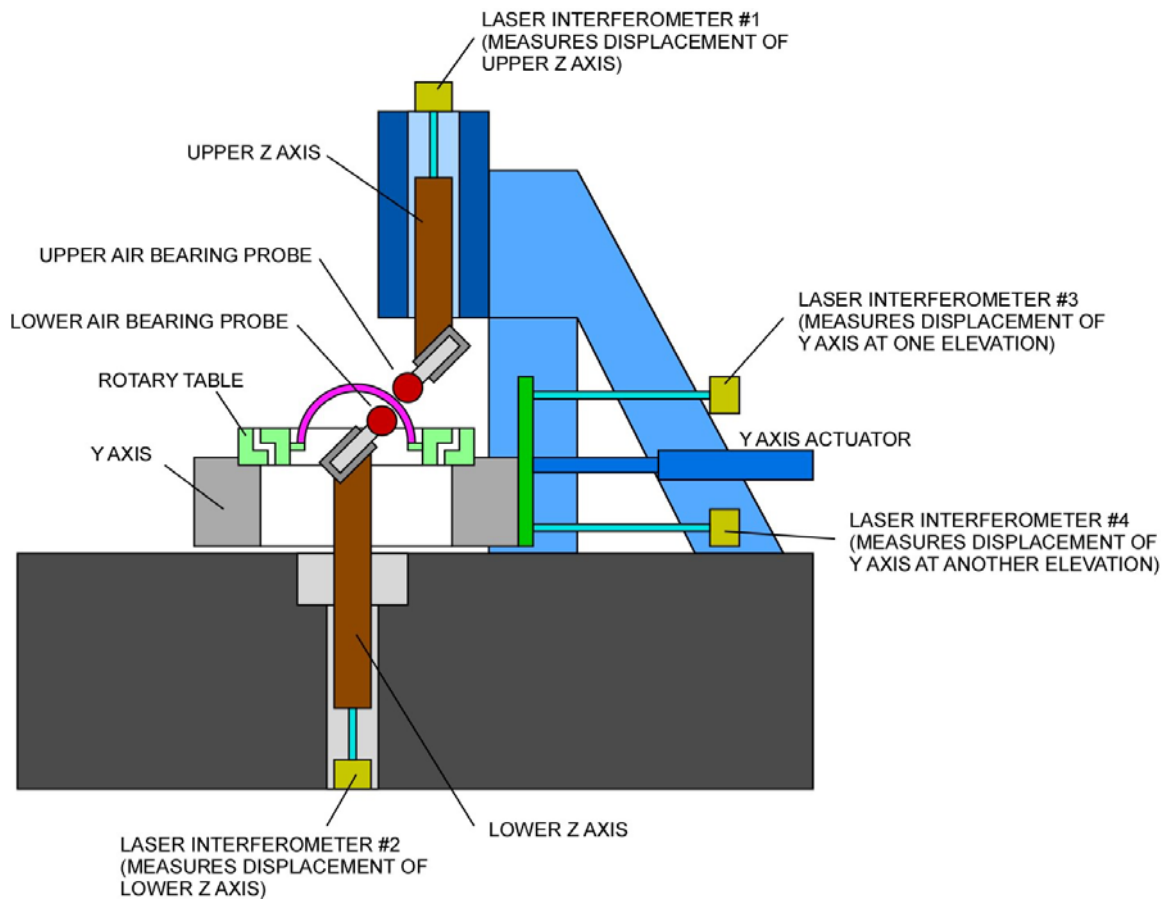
A schematic of The Precision Inspection Shell Measuring Machine (PrISMM)
